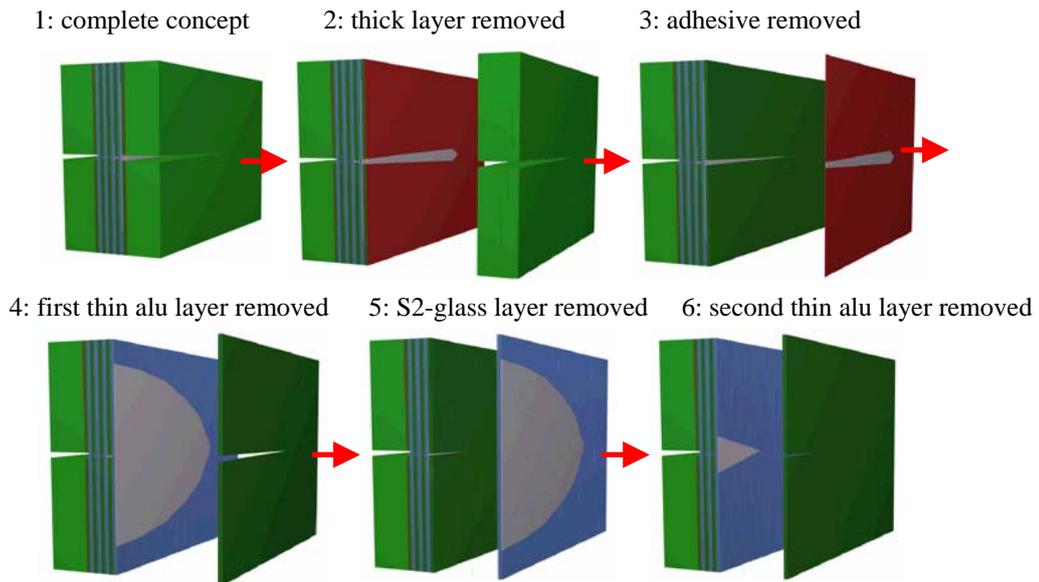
Fatigue cracked material concept, layers removed step by step
